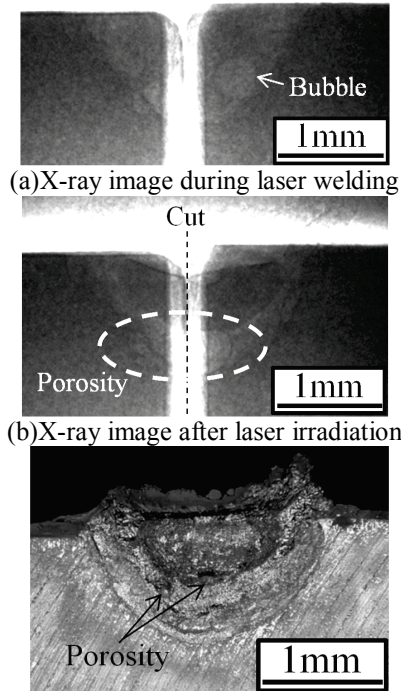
X-ray imaging during/after laser welding and Microstructure in as welded.
